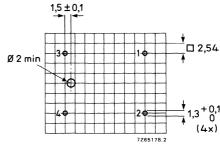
Hole pattern for mounting on a printedwiring board (component side). Hole diameter 1,3 + 0,1 mm; e = 2,54 mm (0,1 in).
